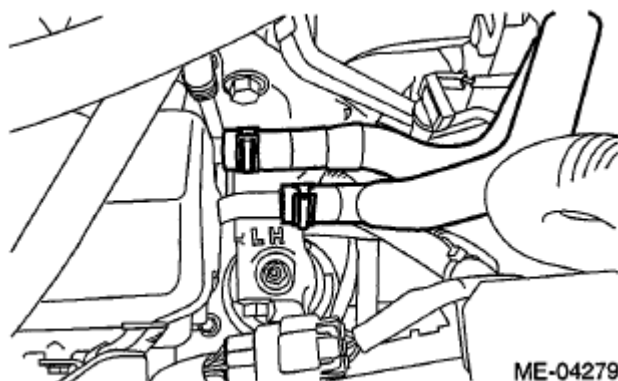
Identifying Heater Inlet Hose And Heater Outlet Hose
